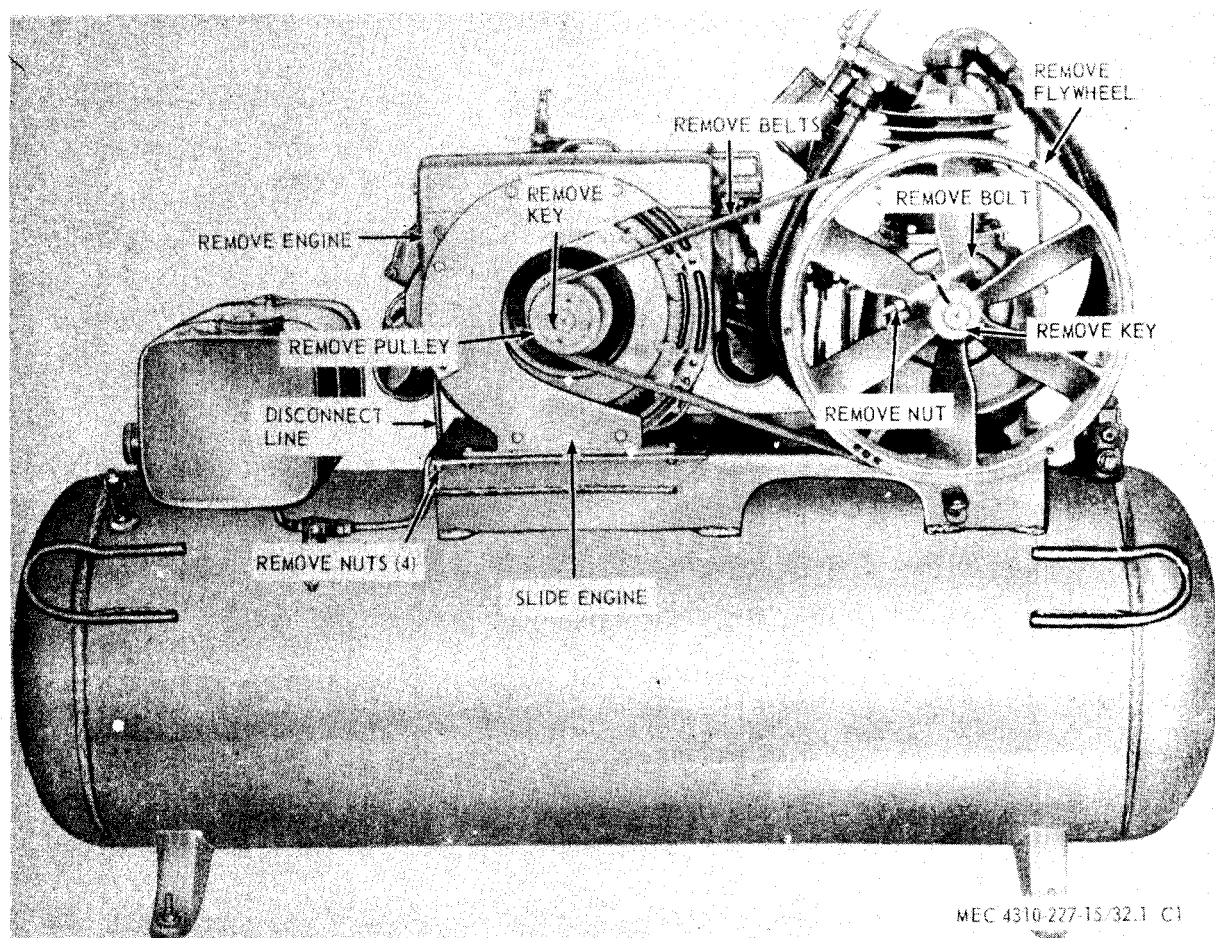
V-belts, crankshaft flywheel, drive pulley, and engine, removal and installation (Model OEG-458-ENG-3)
